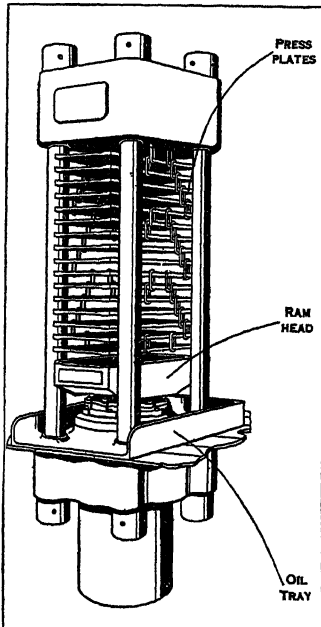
SKETCH OF HYDRAULIC CAGE-TYPE PRESSES AND KETTLE
